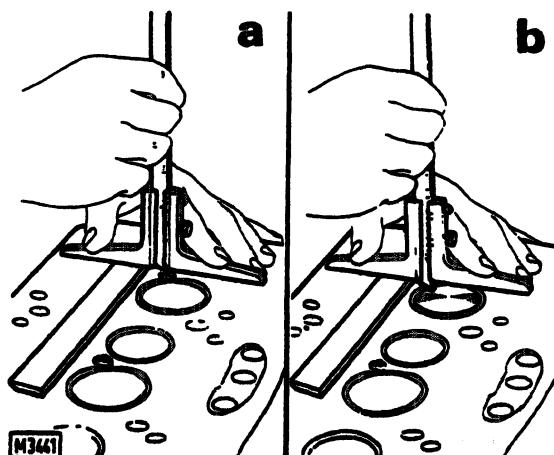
Checking injector protrusion and valve inset with respect to cylinder head deck.
